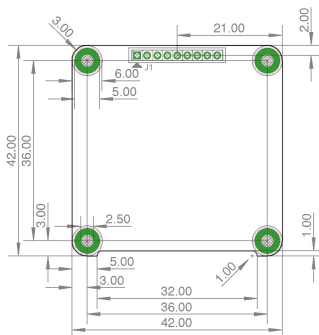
PQ9 Printed Circuit Board (PCB) dimensions.
